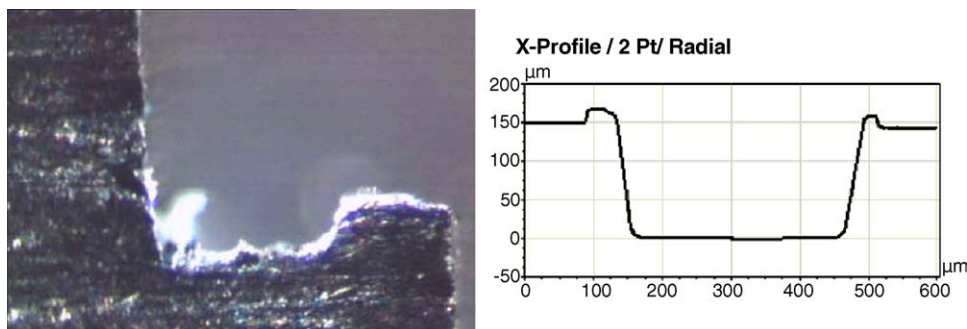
Photograph of a cut of the engraved channel after initial manufacturing in aluminium (left). Optical profiling of another cut, made through a stainless steel device, yielding improved surface topography after changing manufacturing and design (right); please note: this design differs slightly from the right one.
